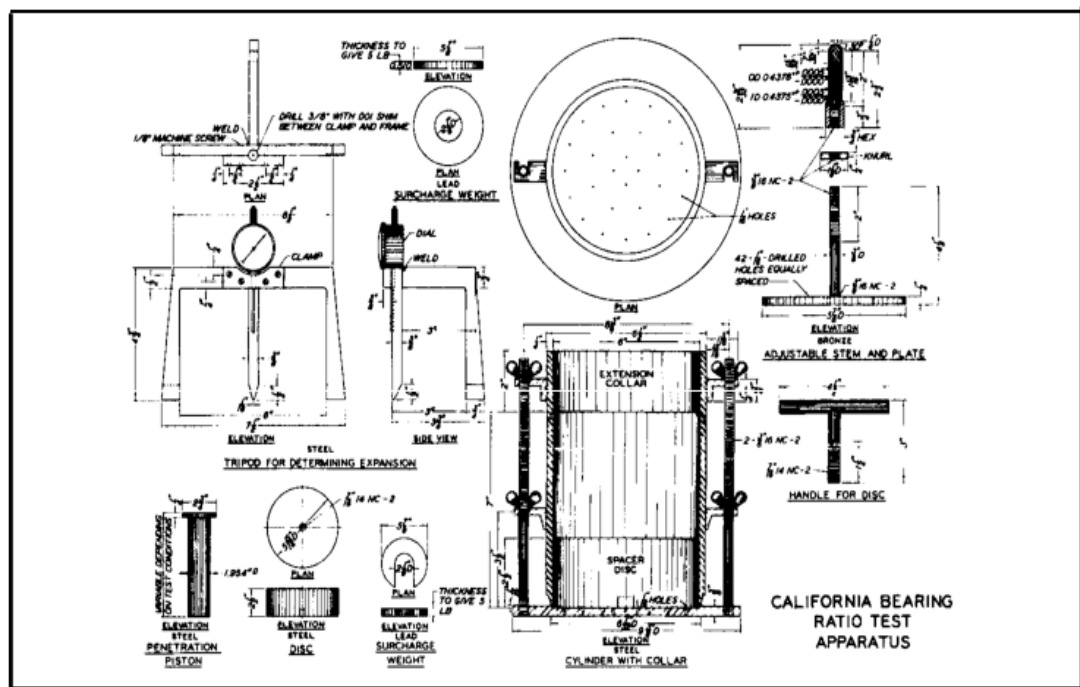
Molds of California Bearing Ratio Test apparatus
